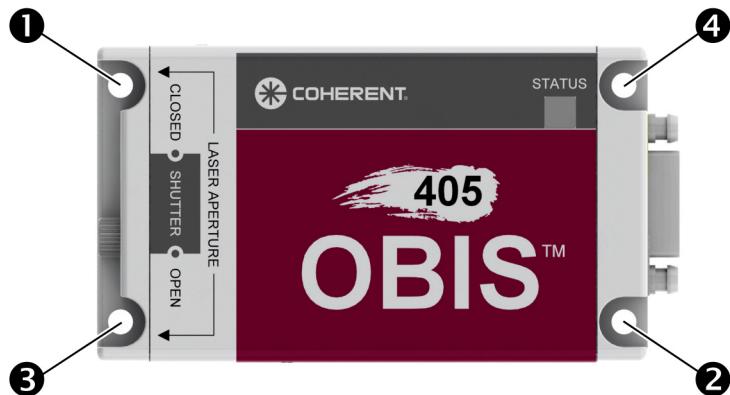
Tightening Pattern for Mounting the OBIS Laser Head
